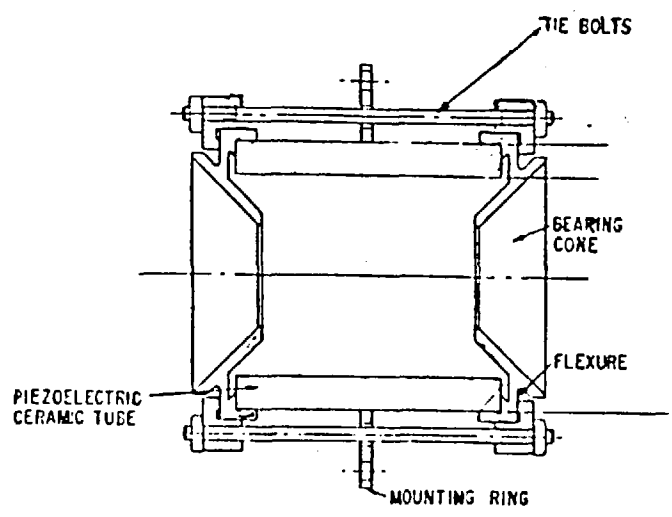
Experimental conical bearing driven by ceramic tube (Ref. 9 )
